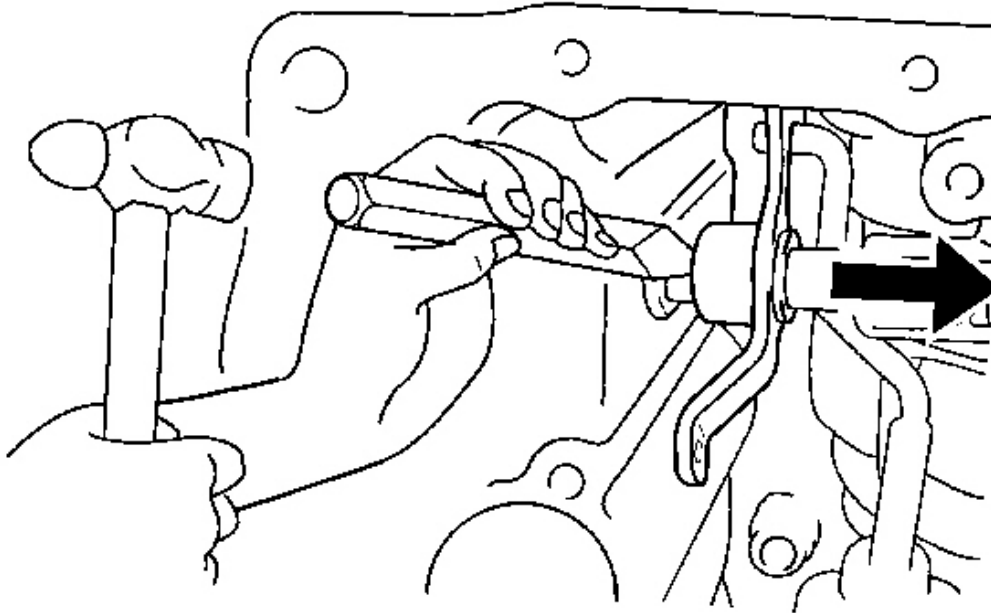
Unstaking & Removing Spacer Using A Chisel & Hammer
